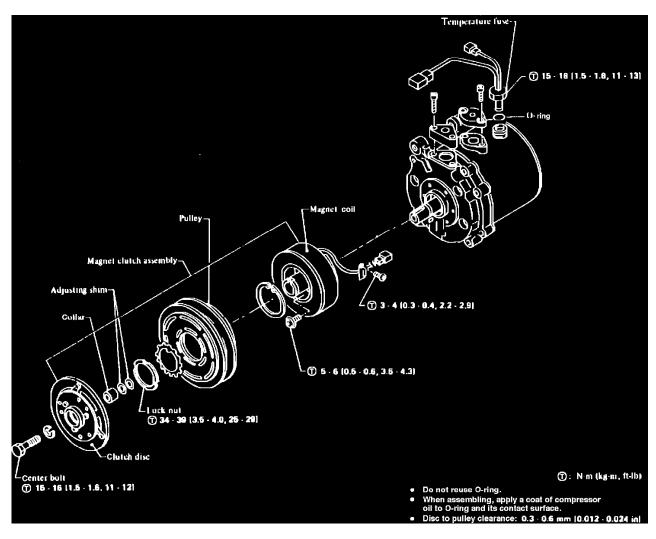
Exploded view of Diesel Kiki DKV-14 series vane rotary compressor
